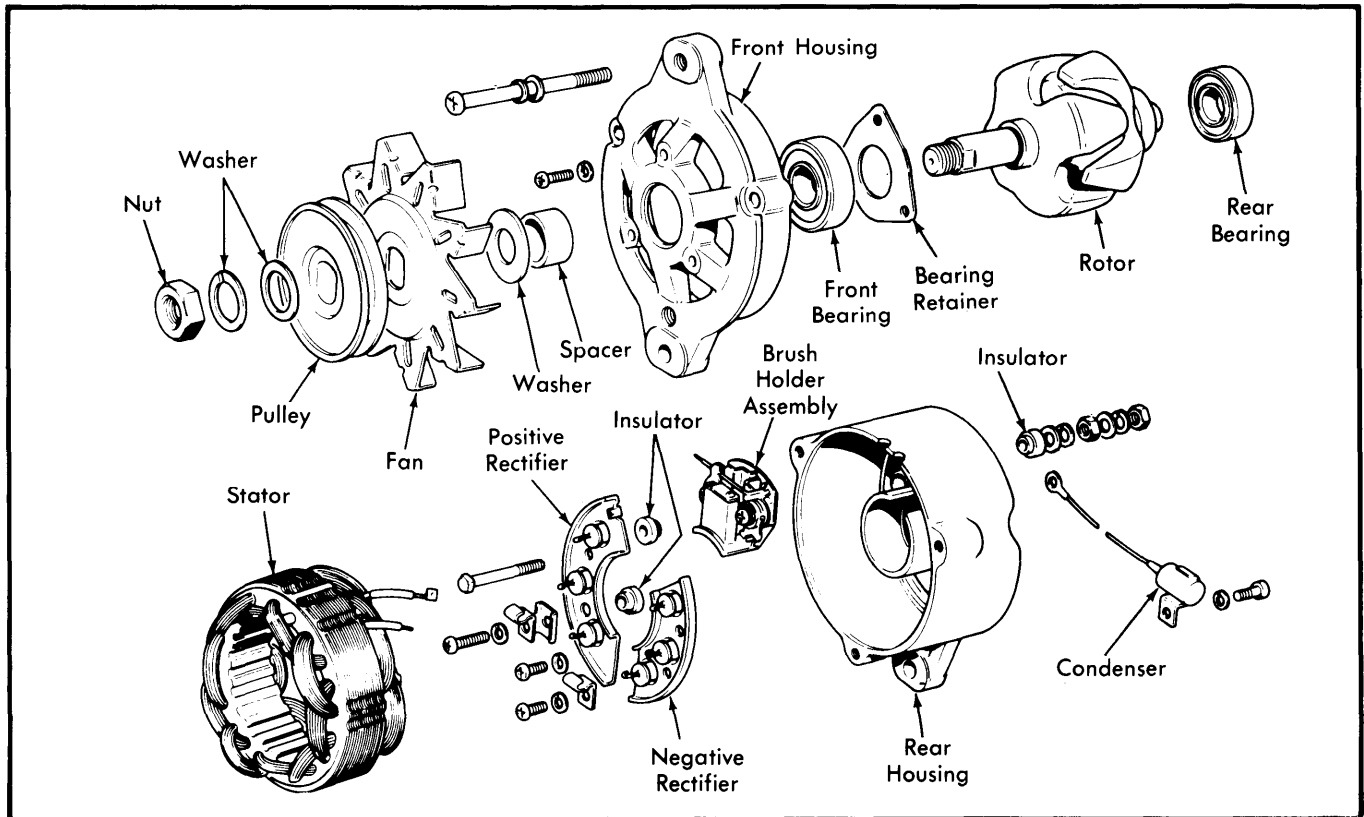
Exploded View of Mitsubishi Alternator (Courier Application Shown)
